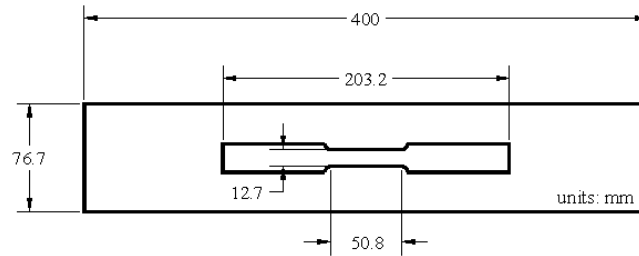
Tensile specimen sectioned from hydroformed tube
